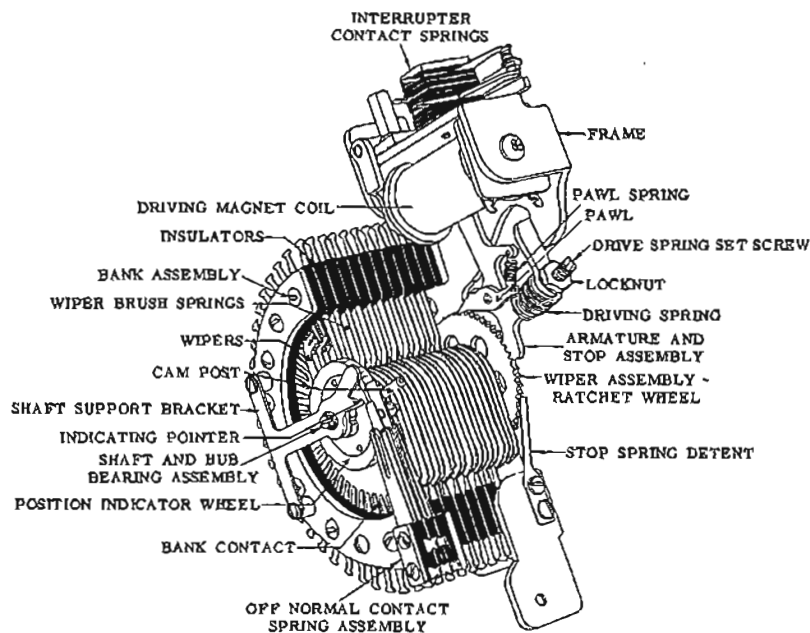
Type 45 Rotary Stepping Switch—assembly details.
